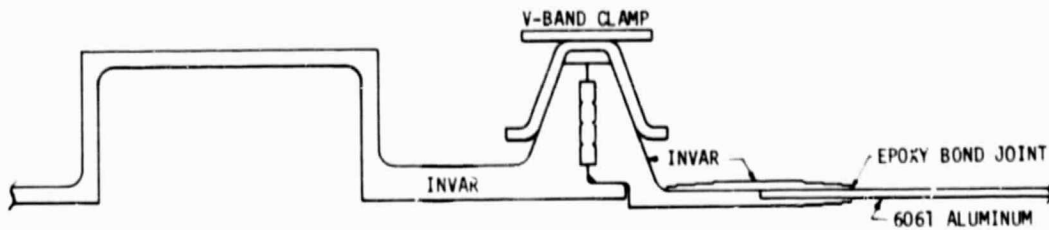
Vacuum Jacket Invar/Aluminum Joint
